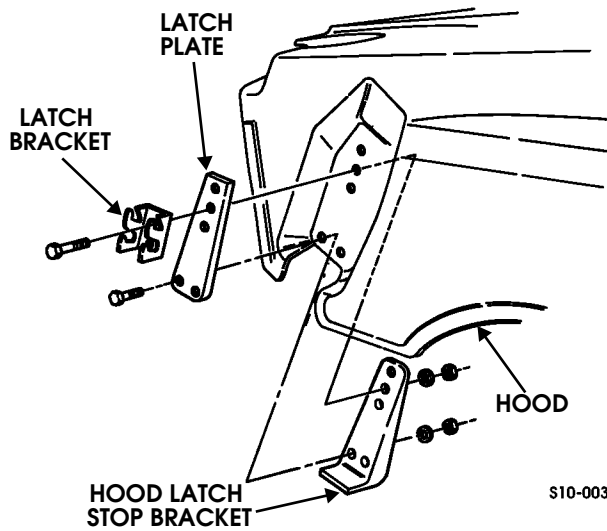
Hood Latch Bracket and Latch Plate Replacement
